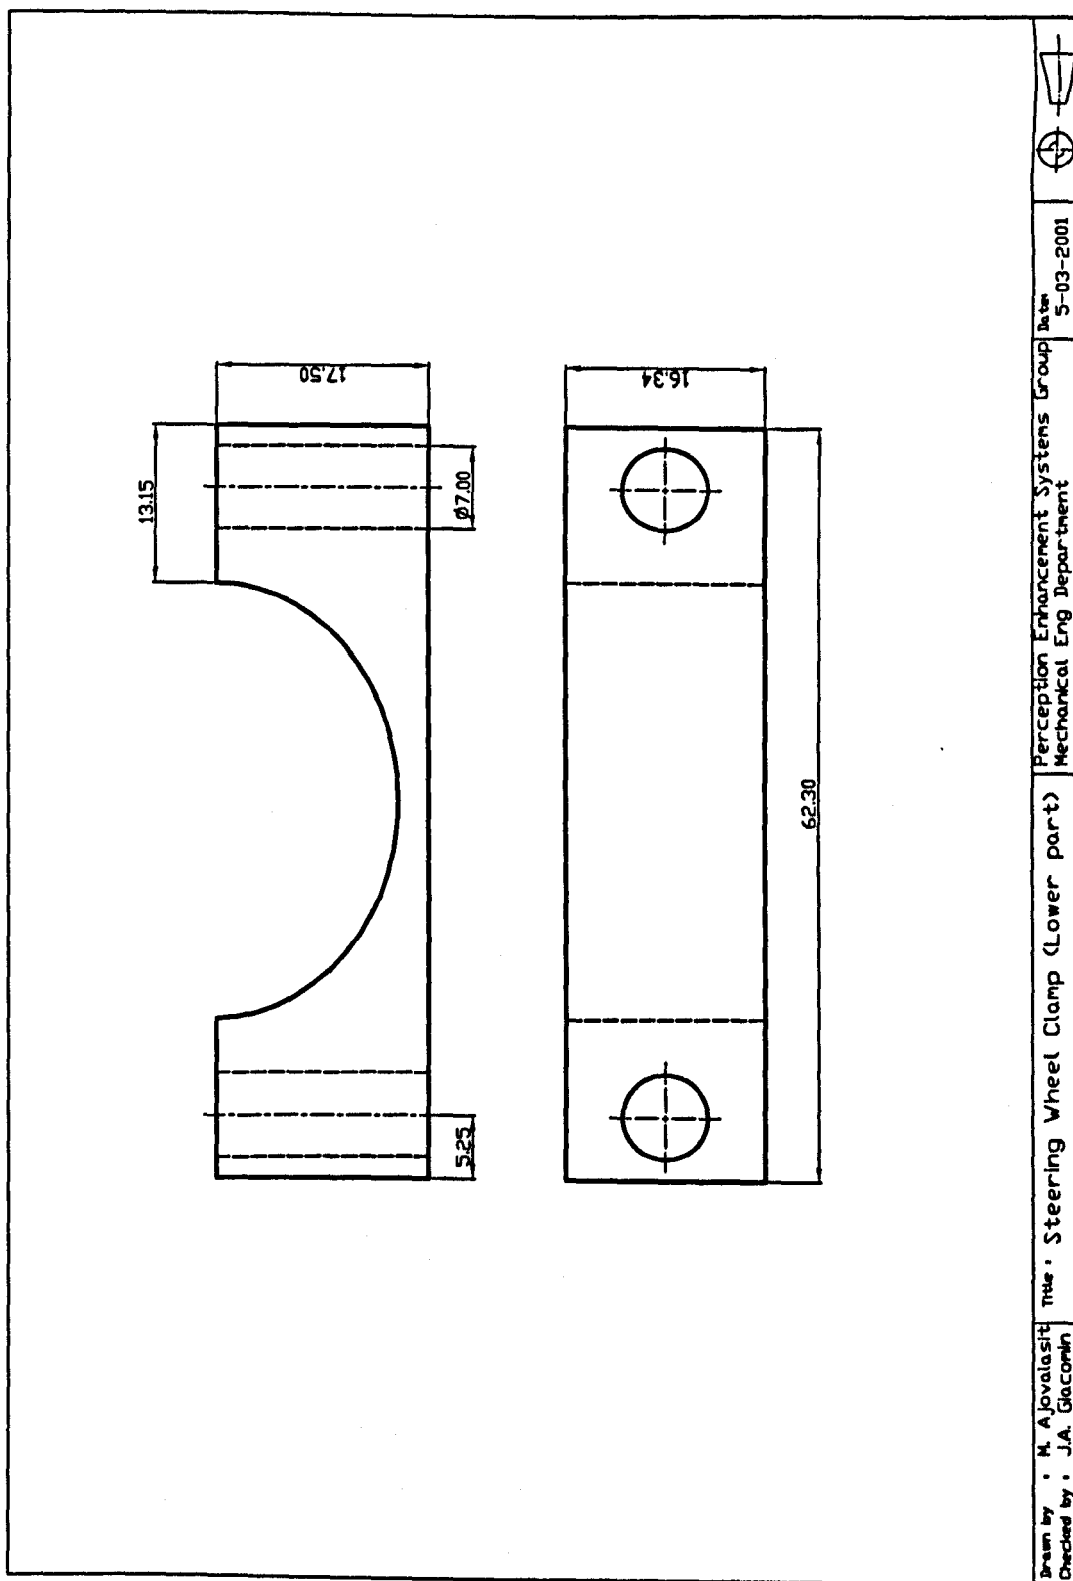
Geometrical dimensional of the lower part of the steering wheel clamp used to record the steering wheel idle vibration on the test automobiles.
